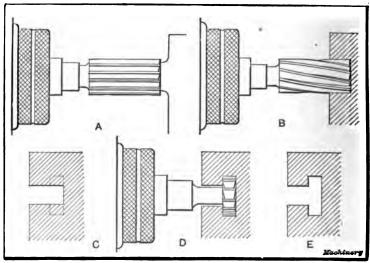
End Milling-Diagrams illustrating use of T-slot Cutter
